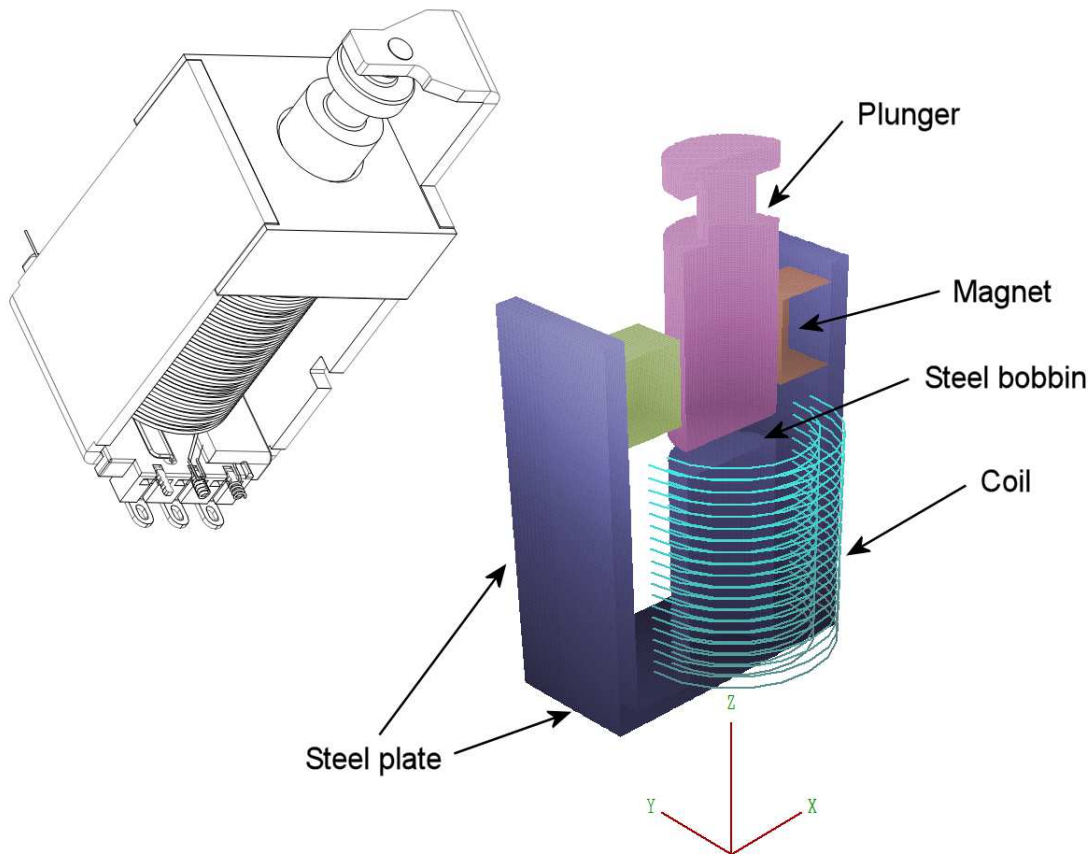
Latching solenoid assembly – drawing and three-dimensional mesh. The parts are displayed in the space $y \geq 0.0$ mm and the coil in $y \leq 0.0$ mm.
